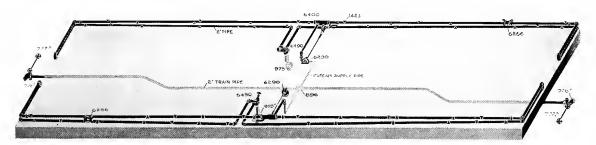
Thermo-Jet Heating System for Passenger Cars.
